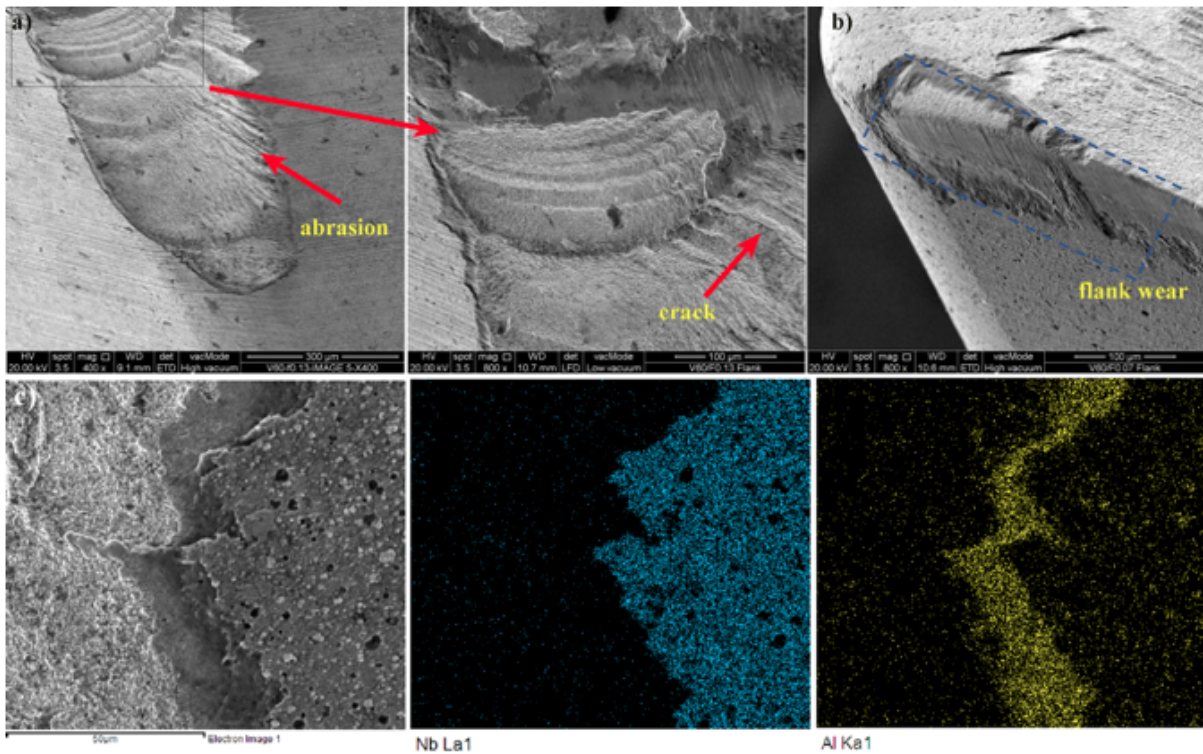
Abrasive wear and cracks on the surface after flaking (b) EDX mapping showing delamination of coating layers (c) Abrasive wear led to widening of flank wear width
